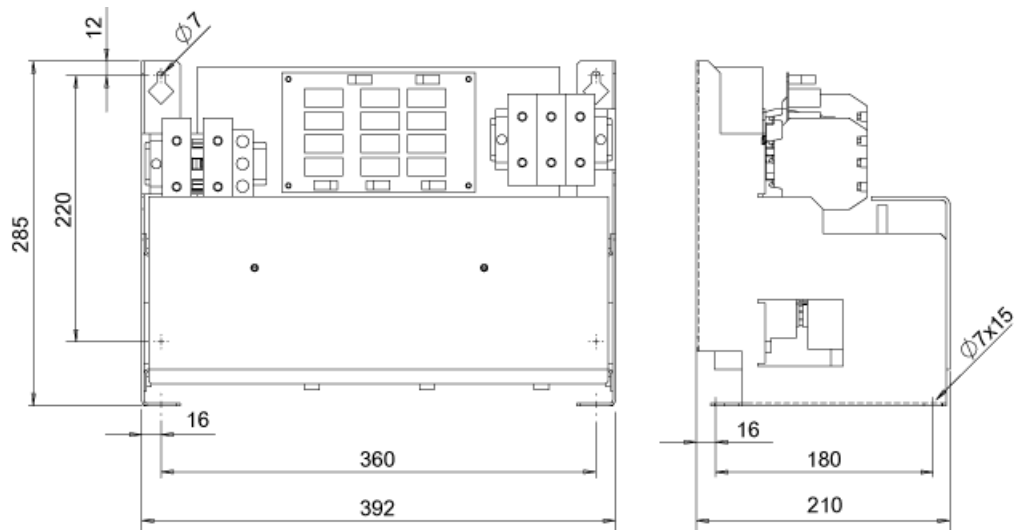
Dimension drawing of the Voltage Peak Limiter, type 2
